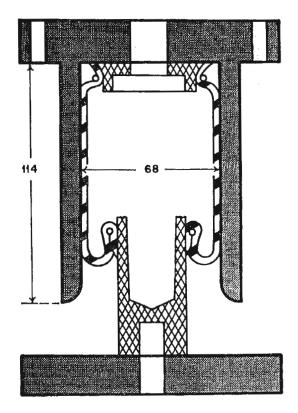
Goodyear 1S3-011 Super-Cushion Air Spring (thick diagonal shading) and its upper and lower retainers (cross hatching) enclosed in the restraining cylinder. Important design dimensions are given in millimeters.
